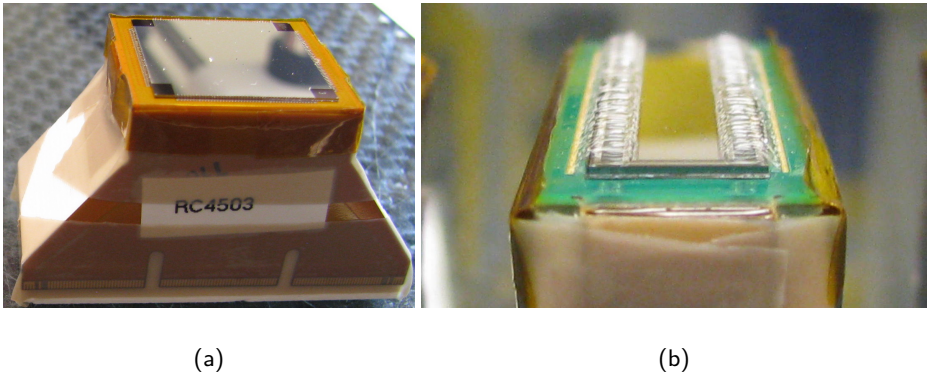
A CMUT chip after it has been wirebonded to a flex-PCB.
